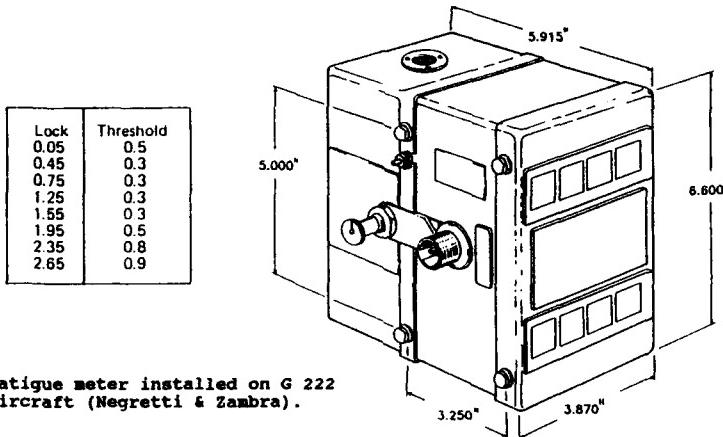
Fatigue meter installed on G 222 aircraft (Negretti & Zambra).
